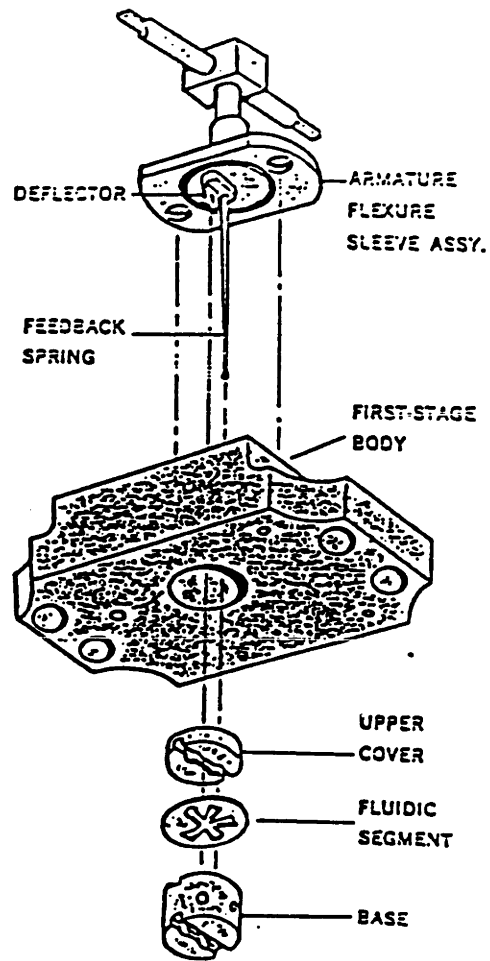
First Stage of Jet Deflector Servovalve Showing A Single Torque Motor and Hydraulic Amplifier. Courtesy Moog Inc. [8]
